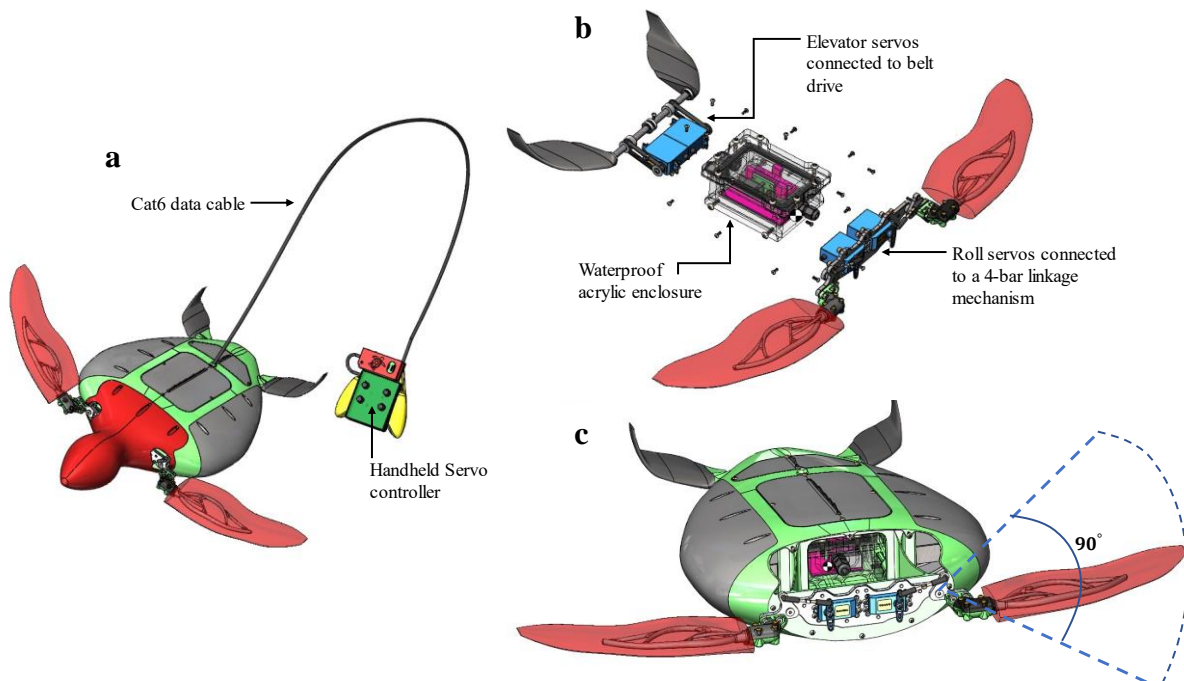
Robot sea turtle assembly. (a) Complete assembly showing hand controller connected to a cat6 data cable. (b) Internal hardware showing front transmission with servos and 4-bar linkage mechanism, waterproof Acrylic electrical enclosure and rear flippers/elevators with belt drive. (c) Front transmission assembly with the front flipper roll amplitude limited to the transverse plane.
